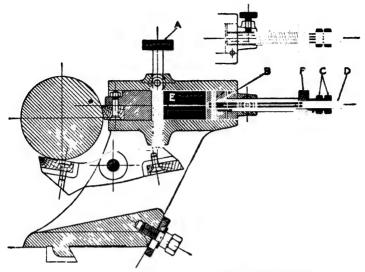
Churchill PBW 12 in. imes 36 in. Universal Grinding Machine
